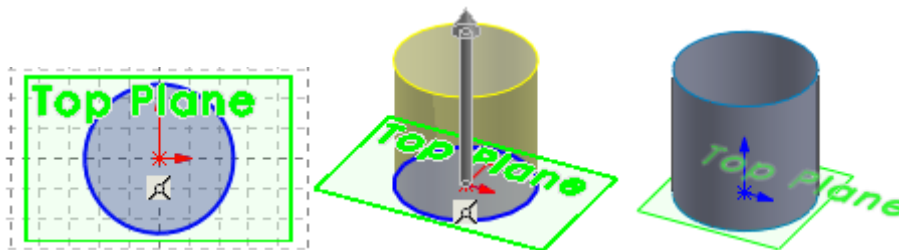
Steps for drawing a cylindrical shell in Solidworks
